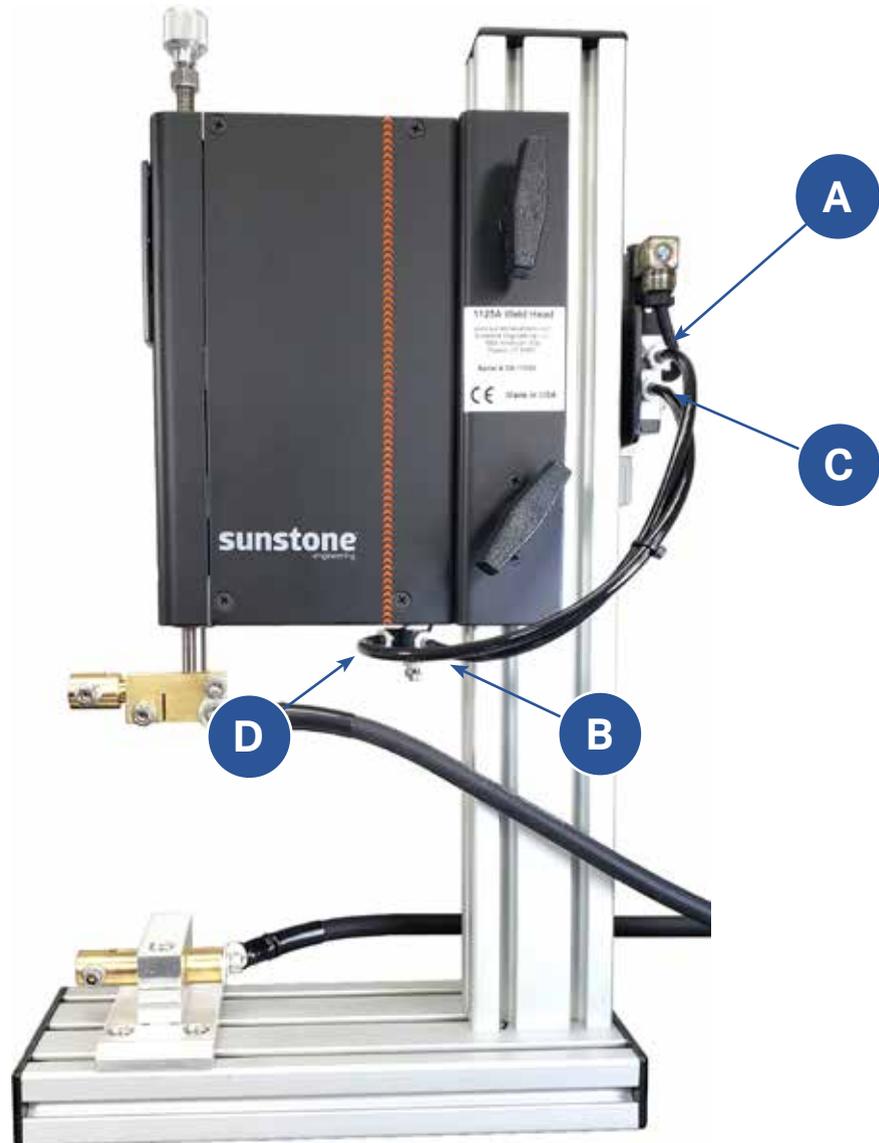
Under the MAC Valve are two air ports, which are connected to valves located under the weld head. The connections between the ports and valves are completed on the factor floor. Verify they are installed correctly.
